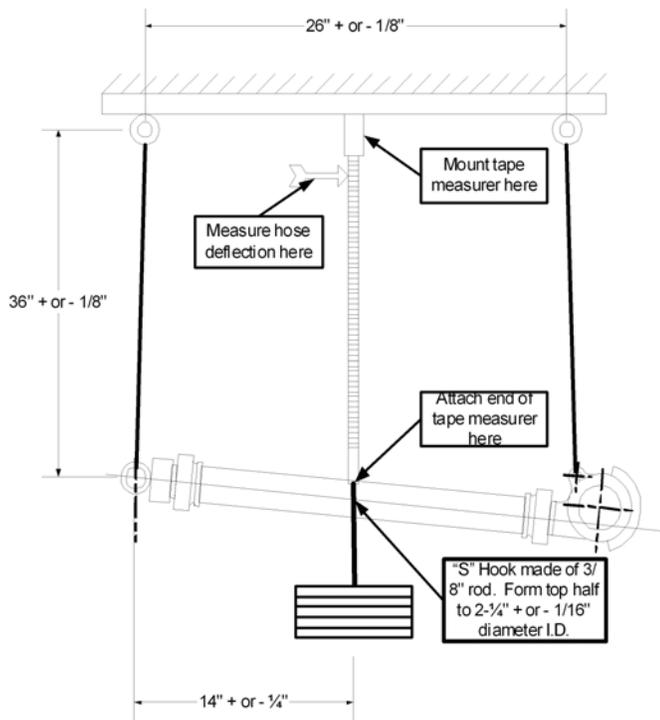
A: Fixture dimensions, Former Proposed SUSPENSION Method, Male x Gladhand
